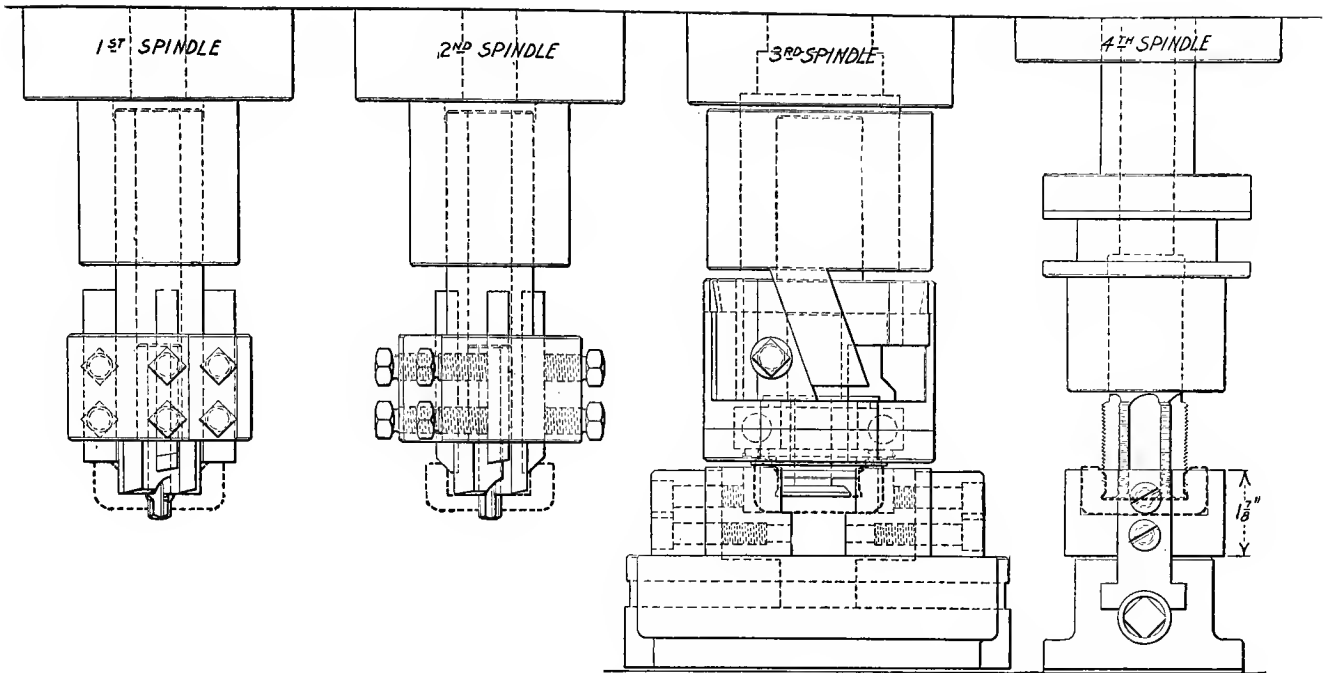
FIRST SETTING ON SHRAPNEL BRASS SOCKETS
